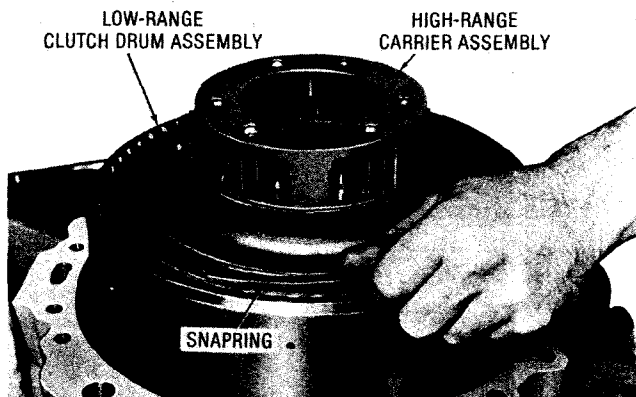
Installing snapping retaining high-range planetary carrier assembly (TRT-3 overdrive)
